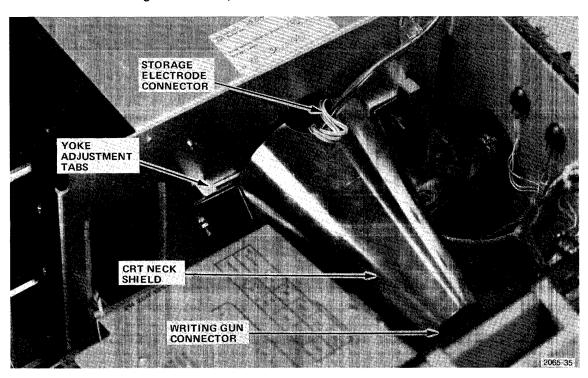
CRT neck shield, crt electrodes and yoke adjustment assembly.
